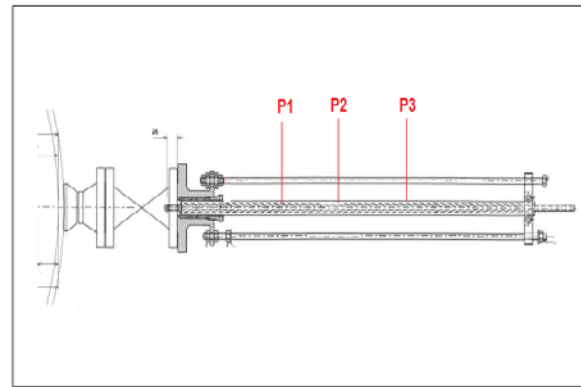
Drawing of the isokinetic probe, three traversing points marked on the probe guide before testing.
